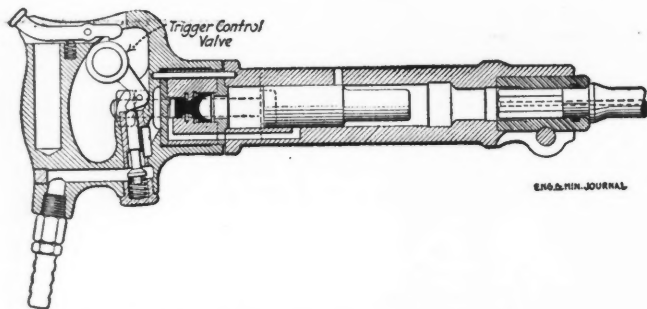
LIGHT PLUGGER WITH TRIGGER-CONTROLLED VALVE
